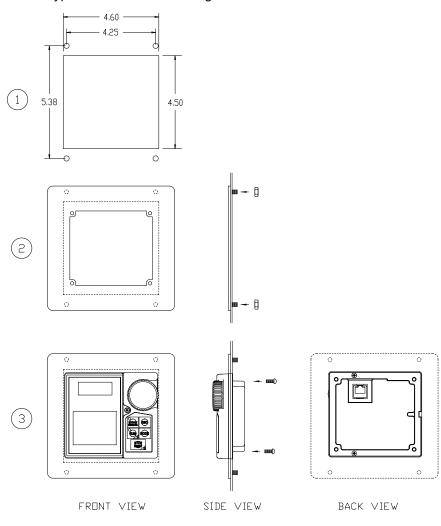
Keypad Bezel Plate Mounting Dimensions.
